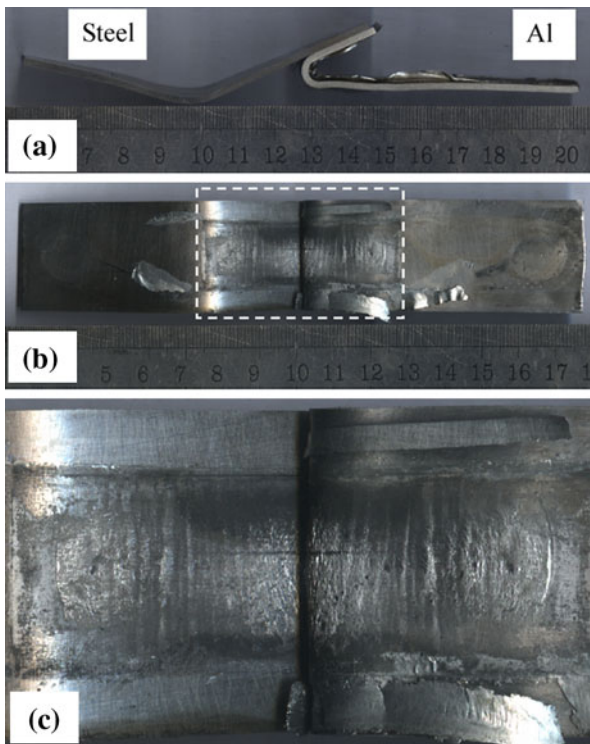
Appearance of (a) the joint after peel test and the fracture surface subjected to peel test at (b) low and (c) high magnification.
